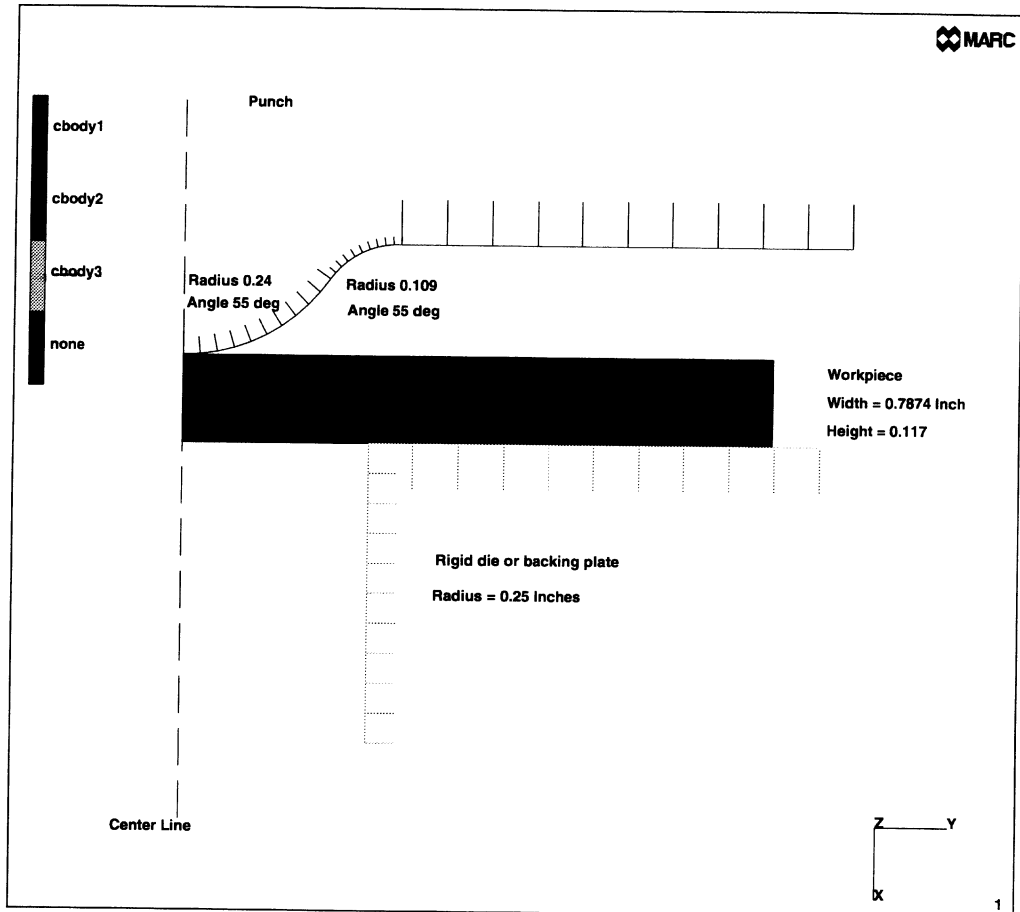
Dimensions of Punch, Workpiece, and Backing Plate
